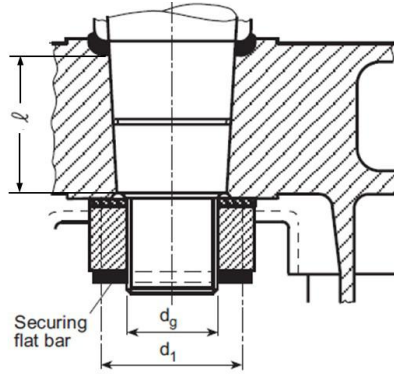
Cone couplings without key with special arrangements for mounting and dismantling the couplings
